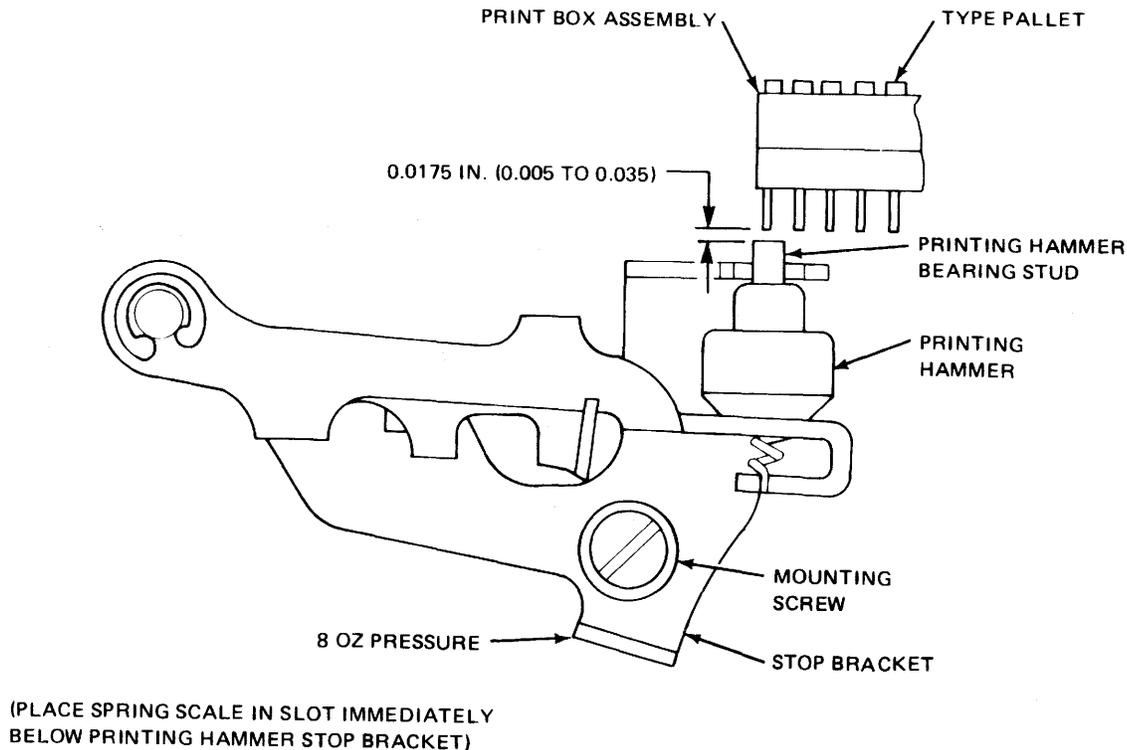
Print Hammer Stop Bracket Adjustment.
